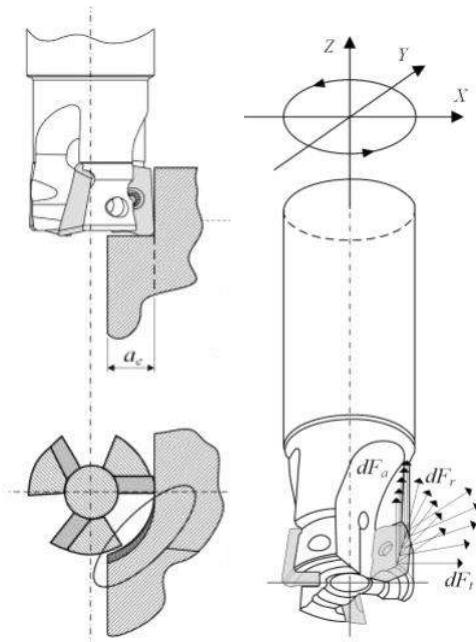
Meshing of the cutting insert and tool-chip zone
